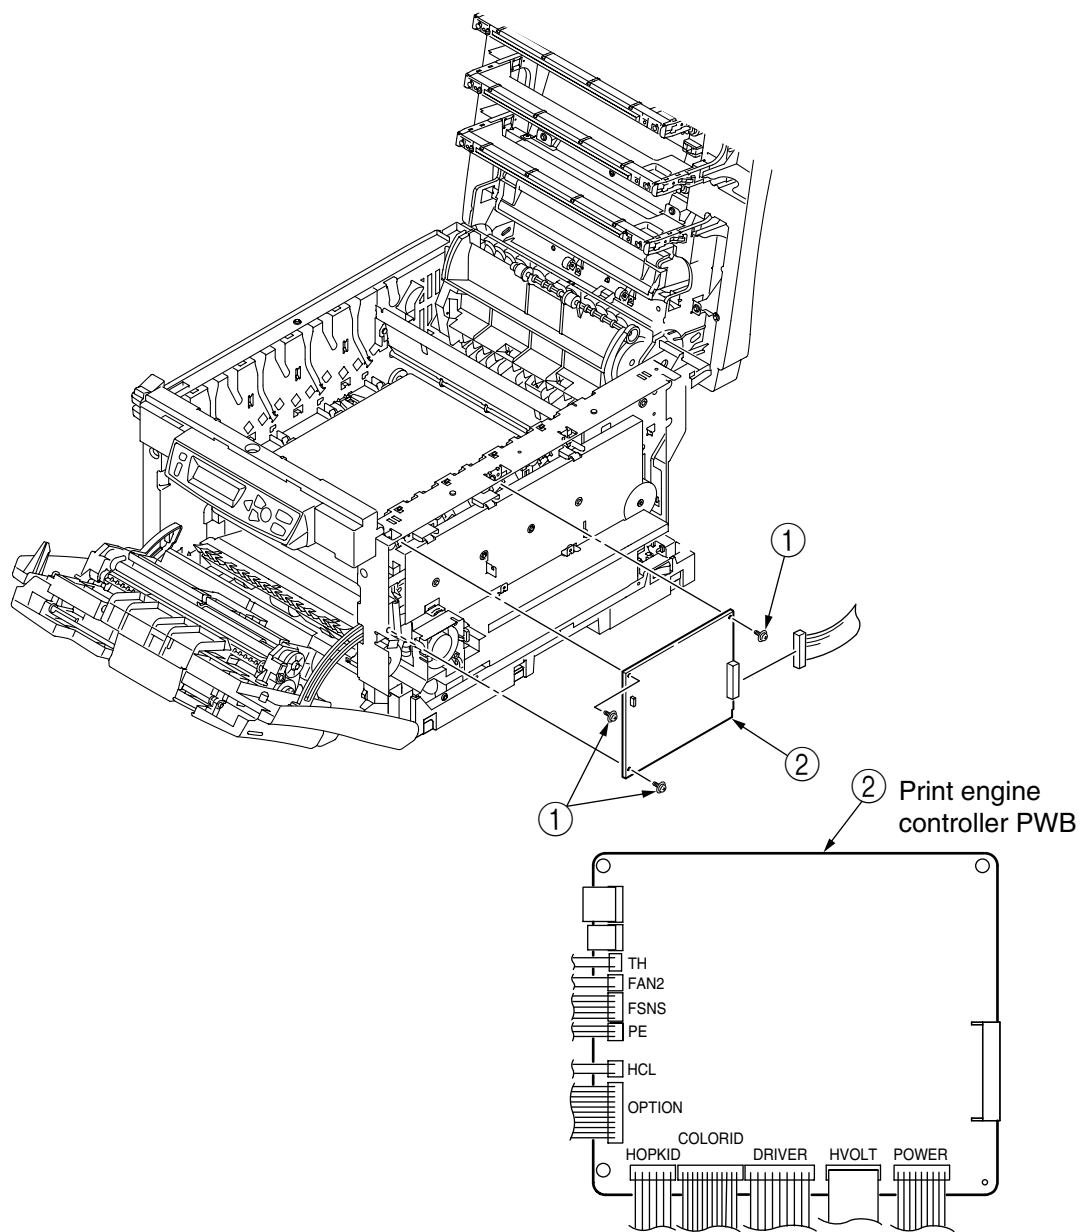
Print Engine Controller PWB (C5100)
